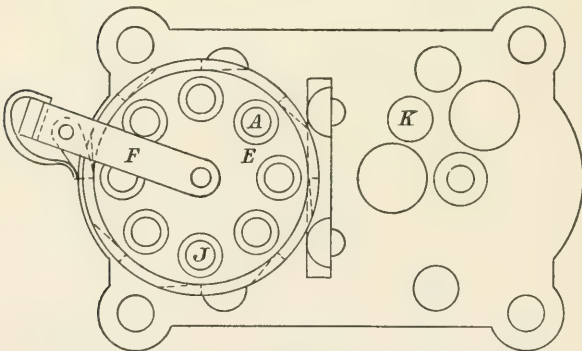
Dobson's Peat Machine—Plan, with one of the Die Blocks removed.
